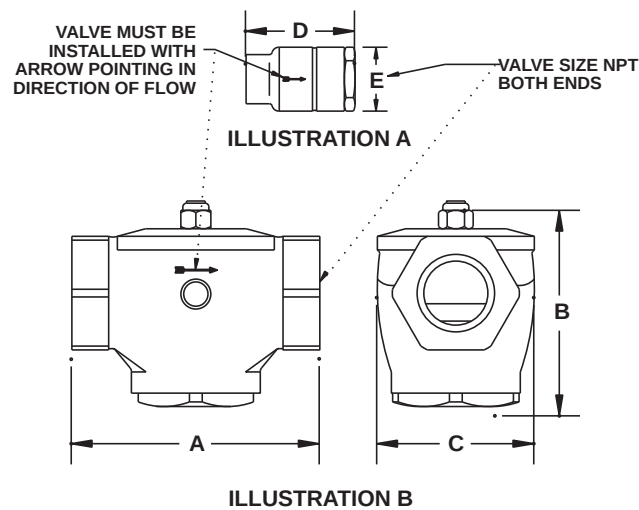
Check Valves, 1/2 in. thru 2 in.
